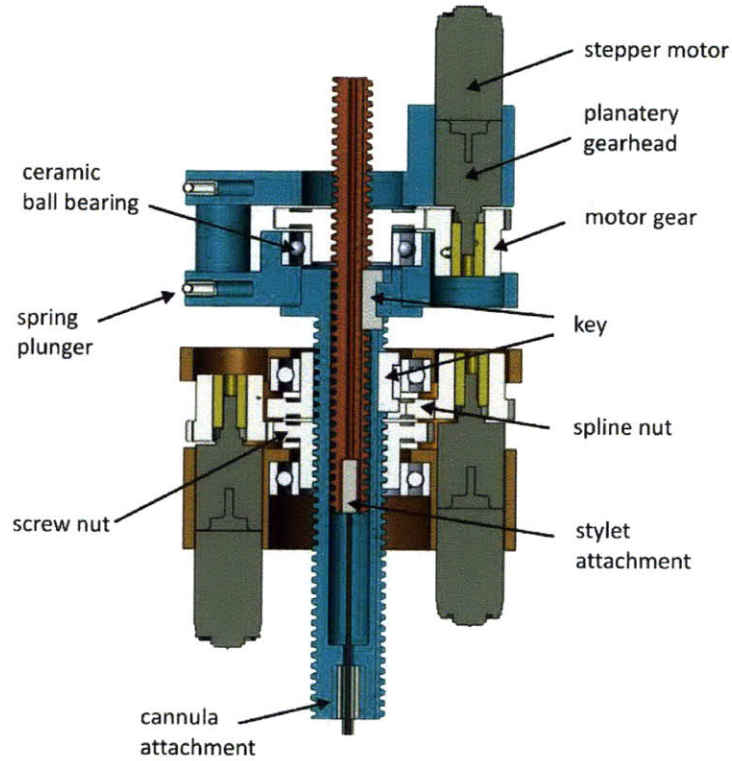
Section view of the drive mechanism. A spline nut and screw nut engage the spline and threads of the screw-spline respectively. Another threaded nut engages the screw that rides inside the screw-spline. The nuts are bonded to the inside race of ceramic ball bearings and have teeth that engage spur gears on the corresponding gearhead shafts. The cannula and stylet have threaded rod bonded to their proximal ends to connect to the screw-spline and screw respectively.
